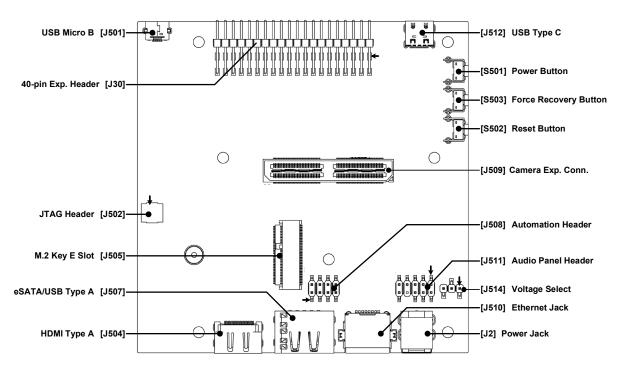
Jetson AGX Xavier Carrier Board Placement - Module Connector Side
